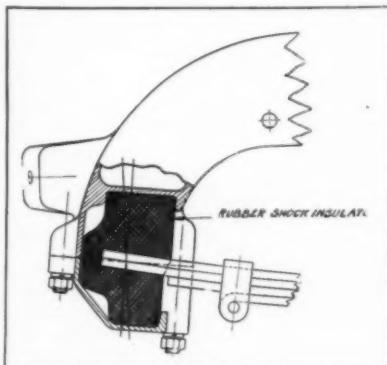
RUBBER SHOCK INSULATOR APPLIED TO FRONT SPRINGS
